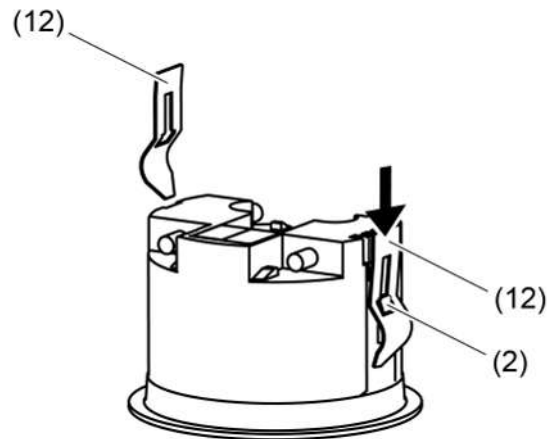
Mounting the spring clips as preparation for flush or surface box mounting
